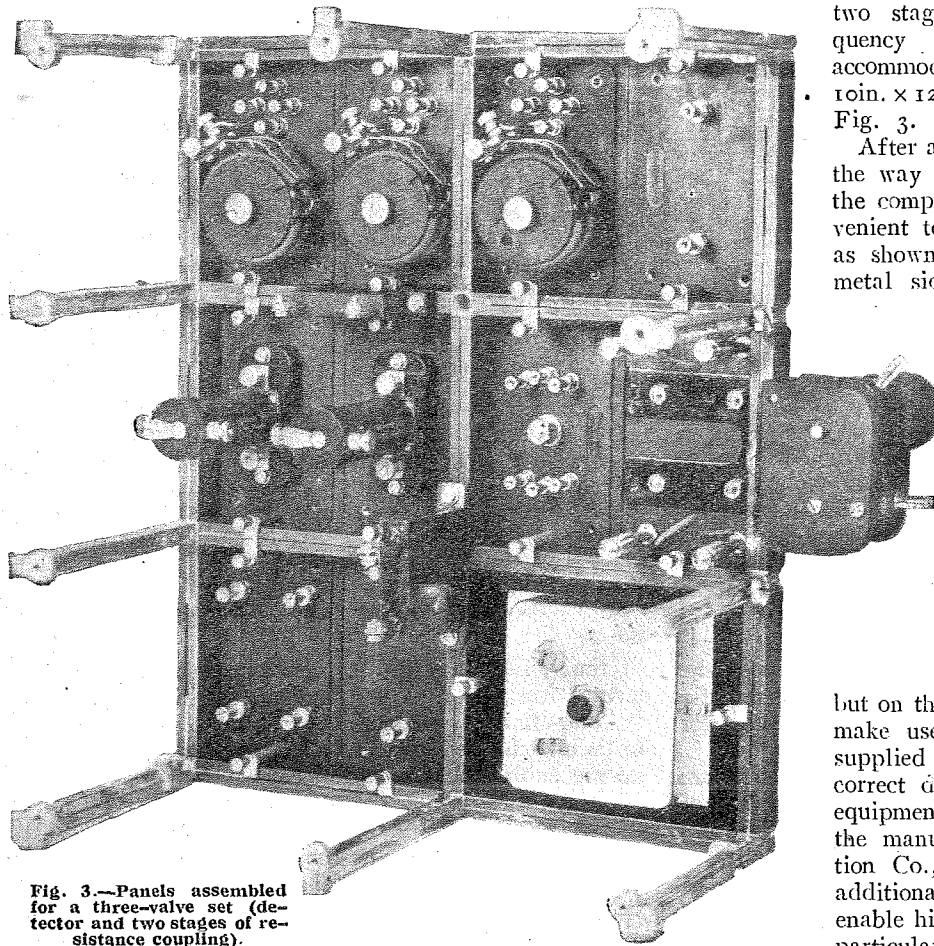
Panels assembled for a three-valve set (detector and two stages of resistance coupling).
